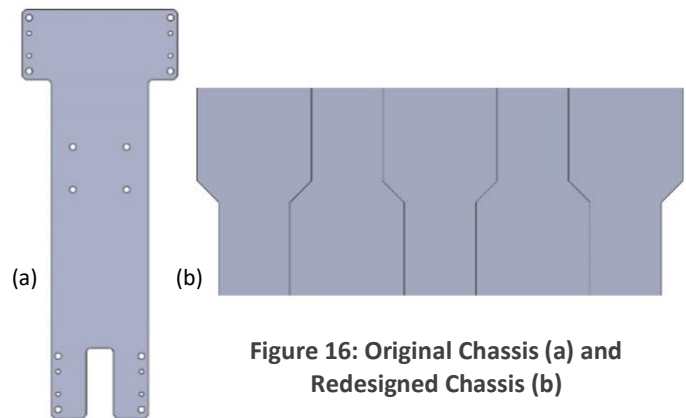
Original Chassis (a) and Redesigned Chassis (b)
